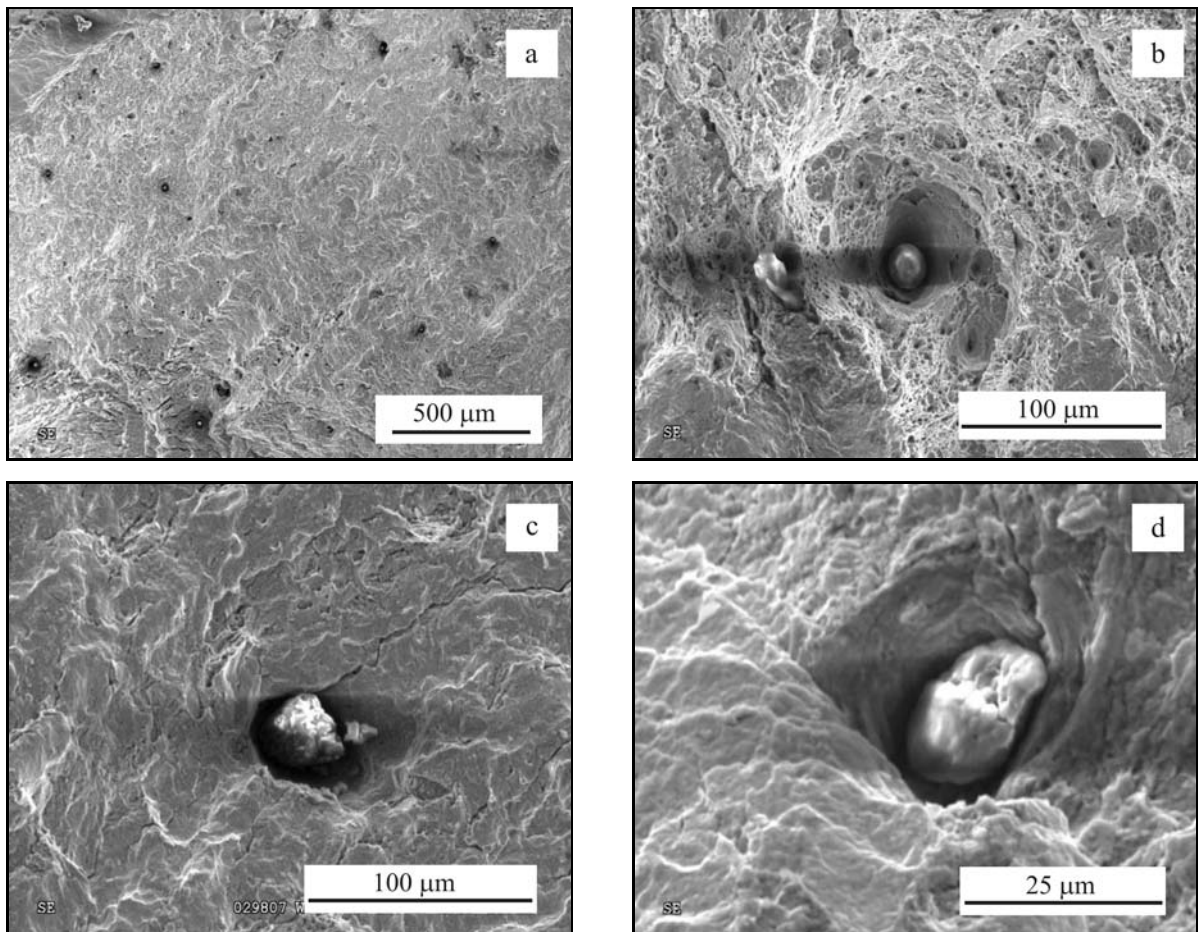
Non-metallic inclusions of different morphology from final rupture surface shown on the ductile part of fracture (a) and from real fatigue fracture area shown on the brittle part of the surface fracture (b).
